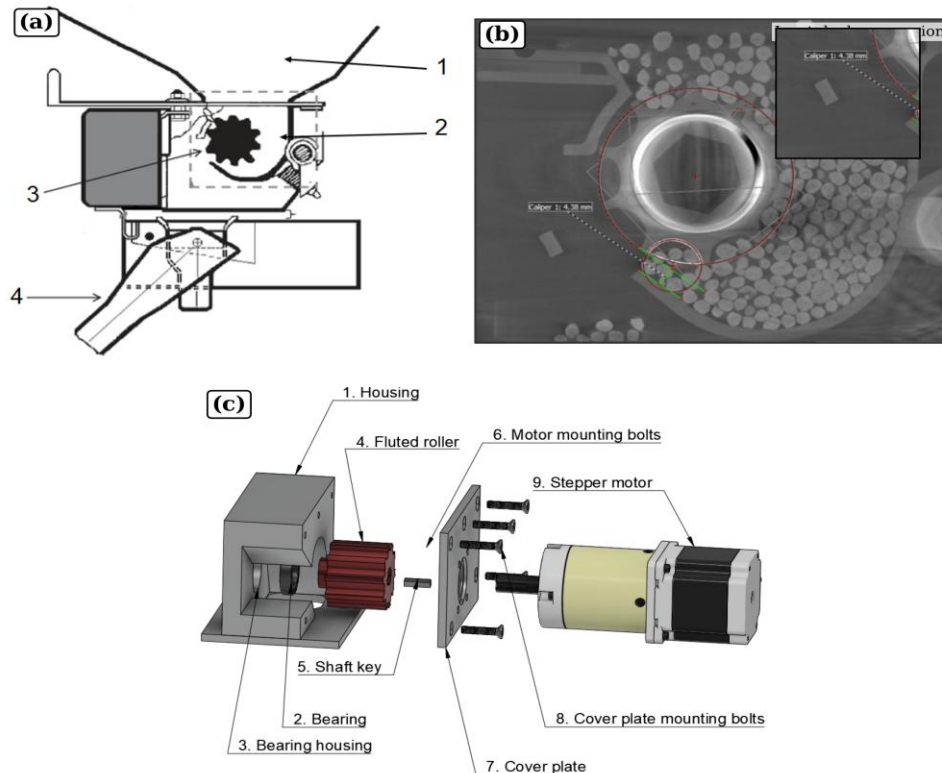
Failure mechanism and redesign rationale: a – grooved-roller volumetric-feeder principle; b – CT cross-section of the original fluted roller showing the 4.38 mm internal clearance and leak path, with a zoomed inset of the critical region; c – redesigned fluted-roller assembly
